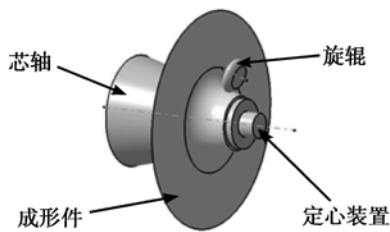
Principle of rotary surface formed by continuous multi-point forming
